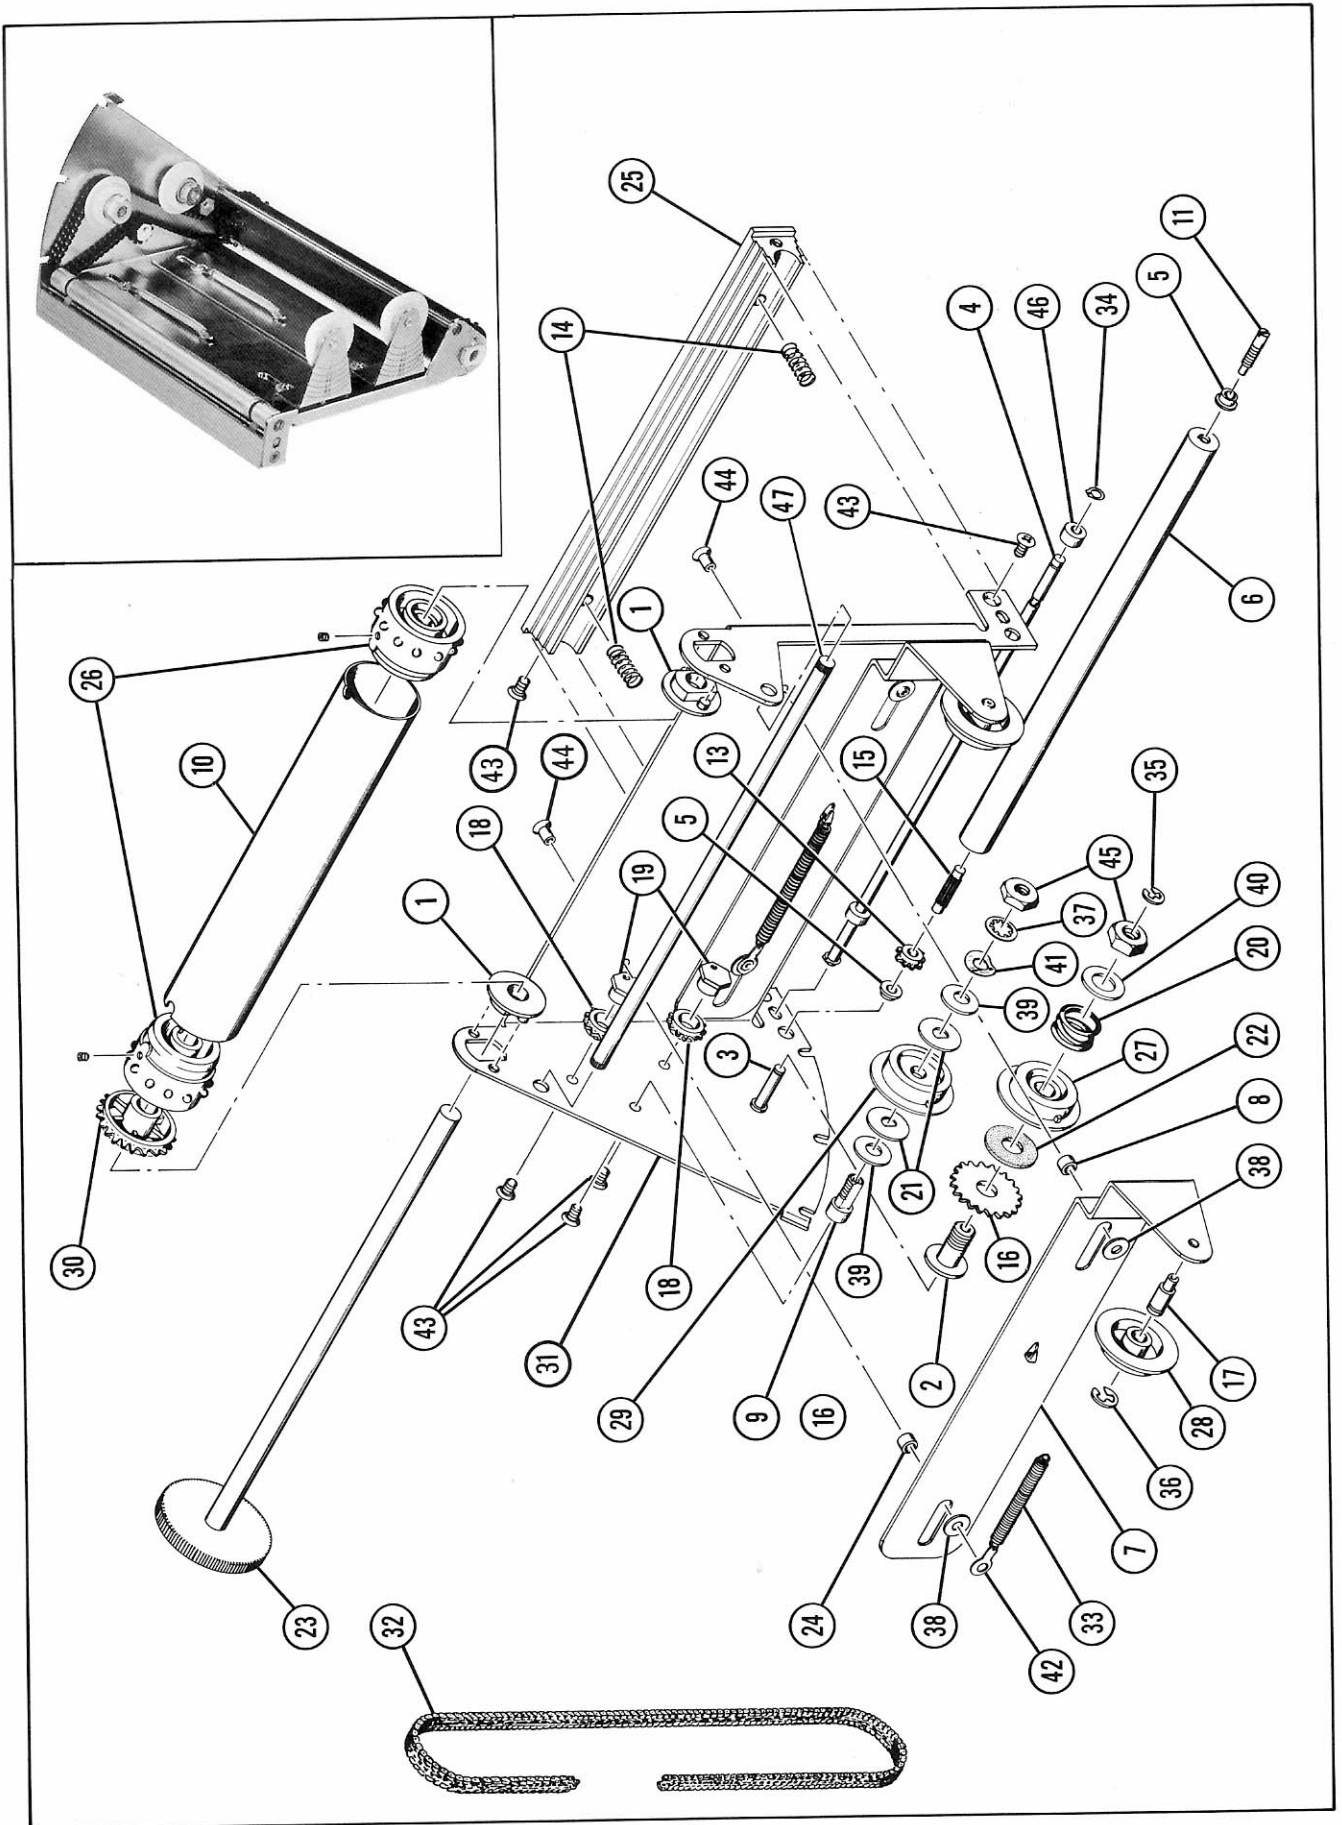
EXPLODED VIEW OF CHART MAGAZINE (Sheet 1 of 2)
